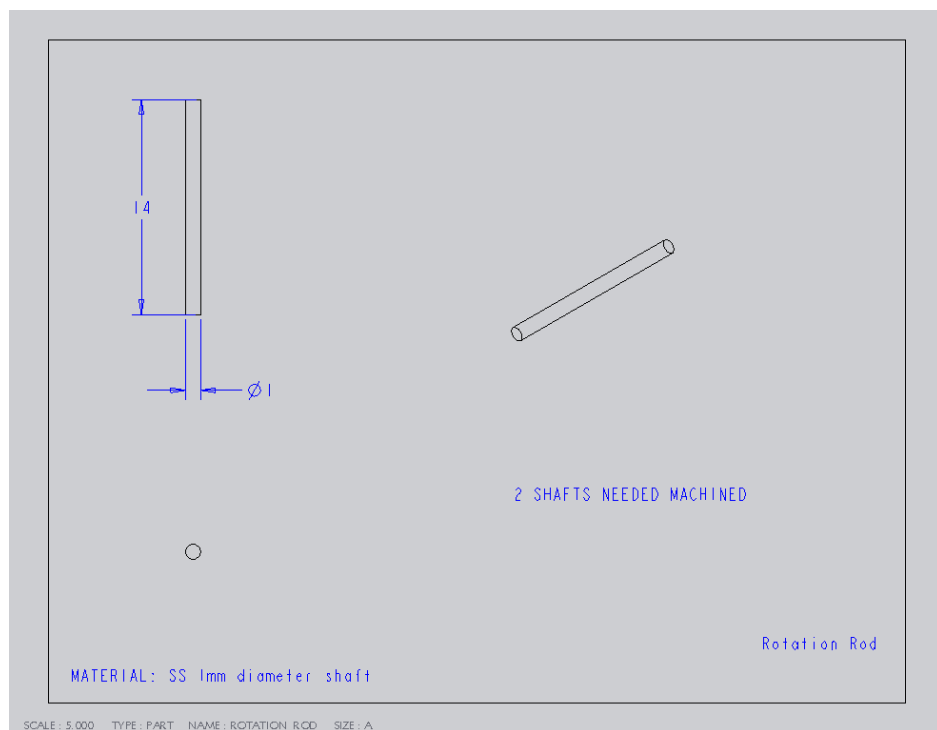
CAD drawing of shafts to connect indenter/coupler to top platform
